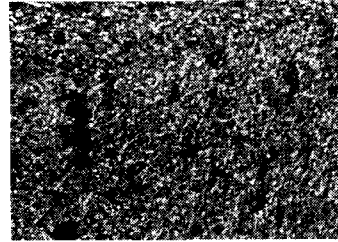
Finished surface covered with the chips formed in machining of Al₂O₃ presintered with natural diamond tool <Workpiece : presintered at 600°C, V=60m/min, f=0.1mm/rev, d=0.5mm>
